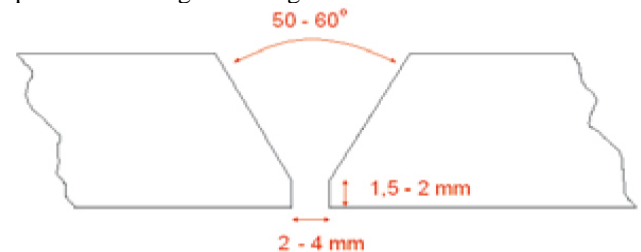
Shape and dimensions of baffle used for joint test welding
